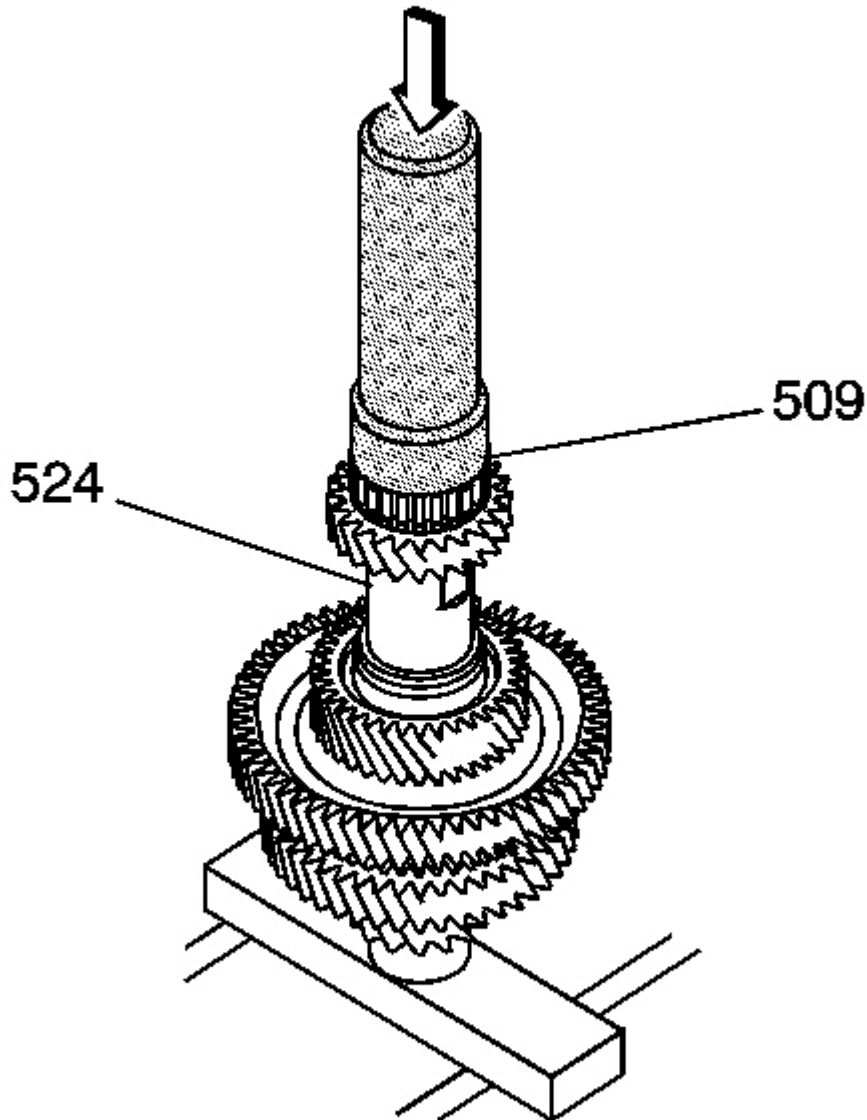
DT 46509 & 5th/Reverse Synchronizer Hub
